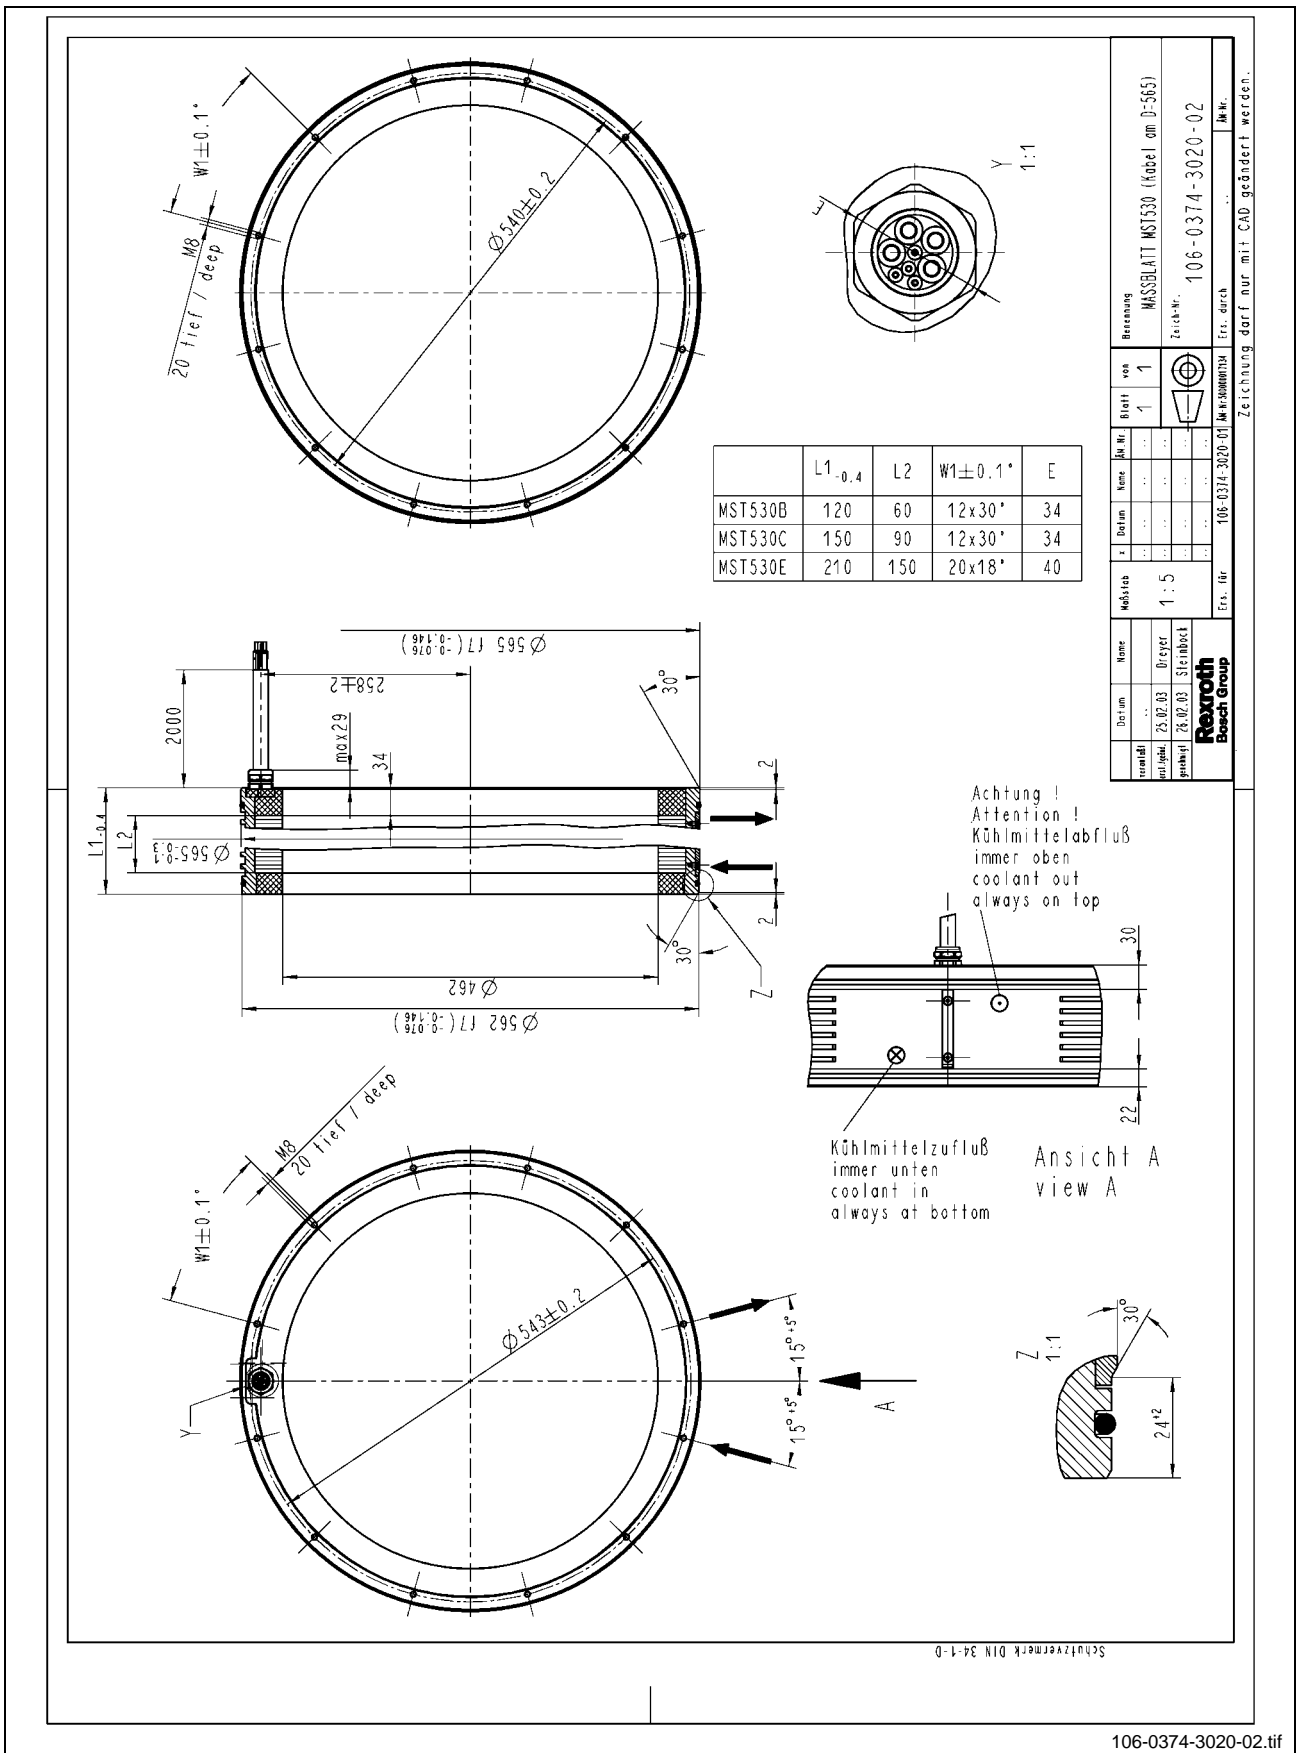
Dimension sheet MST530, electrical connection "CN"
